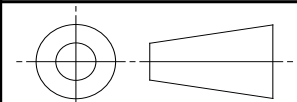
ACCESSORY DIMENSIONS AND CONFIGURATION
